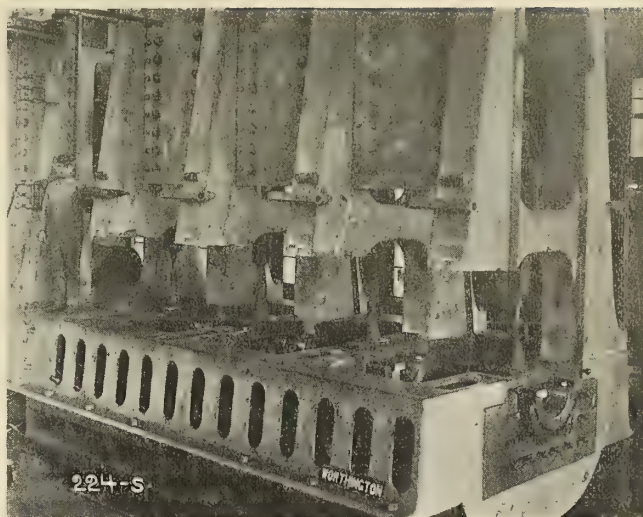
"A" Frame With Section Removed to Receive Shaft
